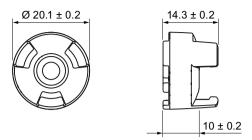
Dimension drawing of spacer 6GT2690-0AG00
